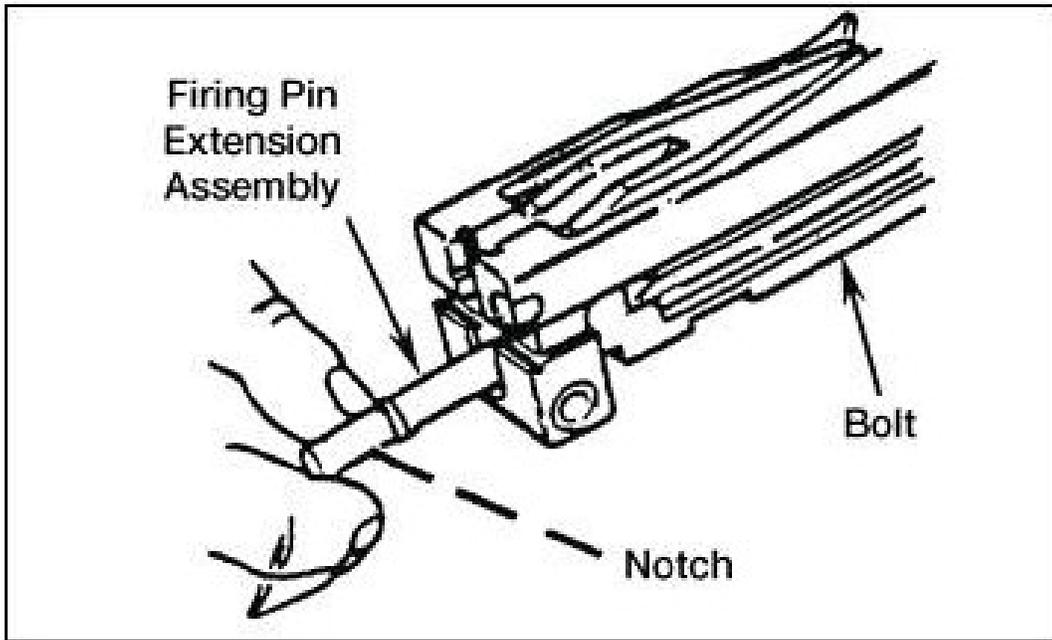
ST-1025_31 (Installation of the firing pin extension assembly)
